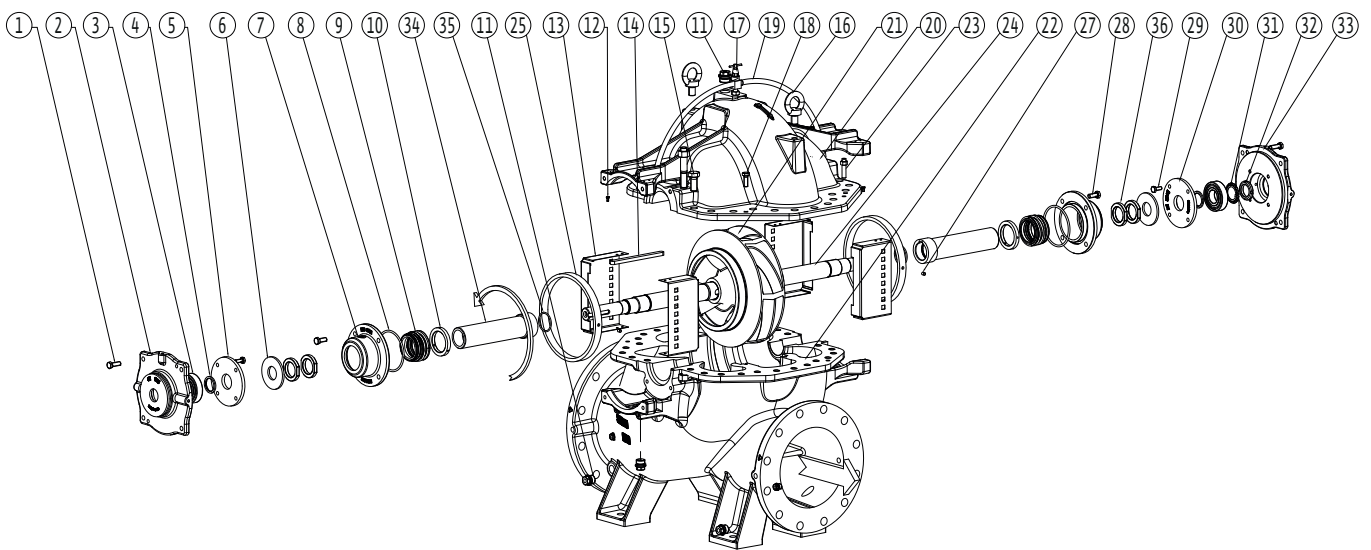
Exploded view of Atmos TERA-SCH hydraulic (mechanical seal version with sleeves)
